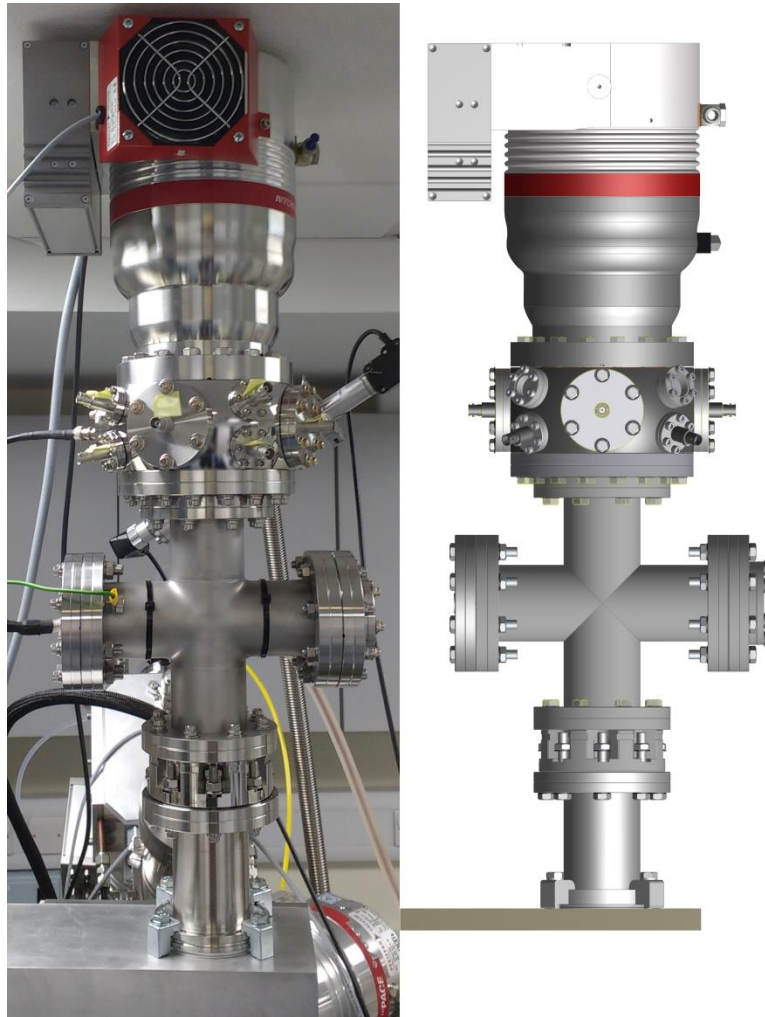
Comparison of assembled analyser mounted on J105 SIMS and CAD model of transfer assembly
